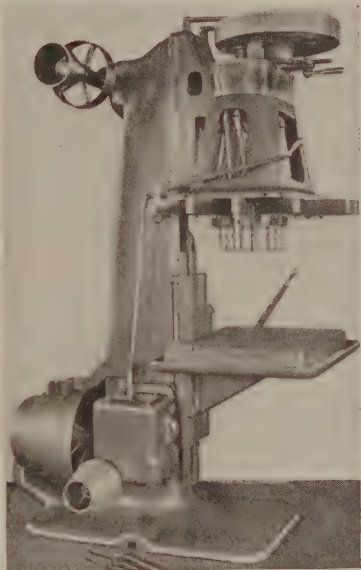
Multiple-spindle drilling machine. (Courtesy of Pratt & Whitney Company.)
